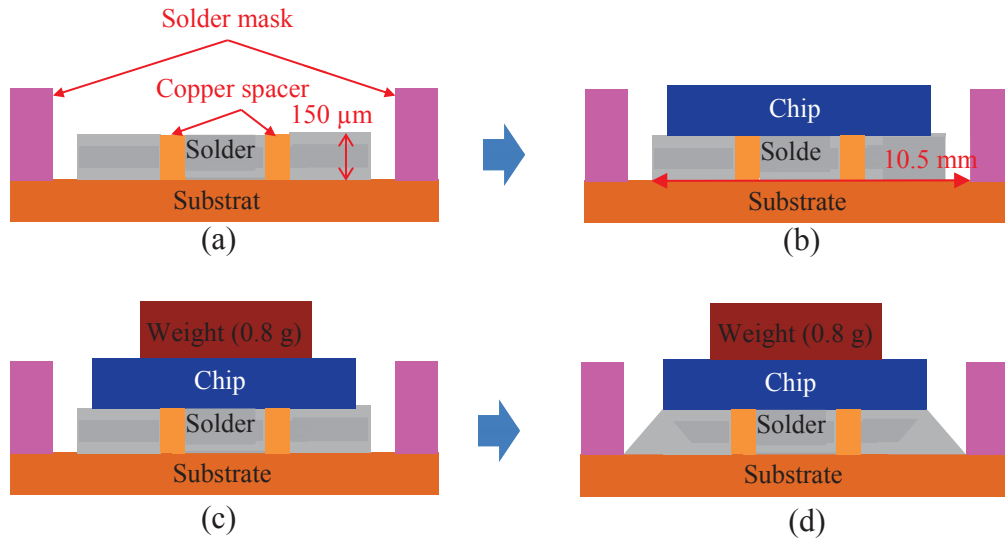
Developed packaging process for hourglass joint in Figure 3-2 (not to scale). Place solder preform, spacers, and solder mask on the substrate (a); place chip with (b); apply 0.8 g weight on the chip (c); and reflow using a vacuum chamber in Figure B-8 (d).
